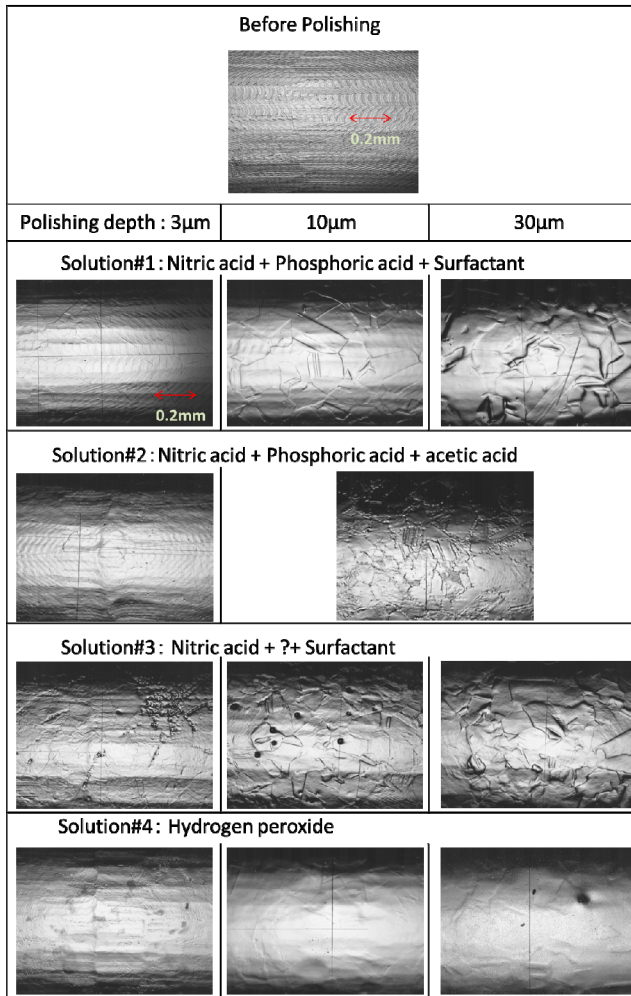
Close-up view of polished surface. Test pieces are machined with the same condition of the vane.
